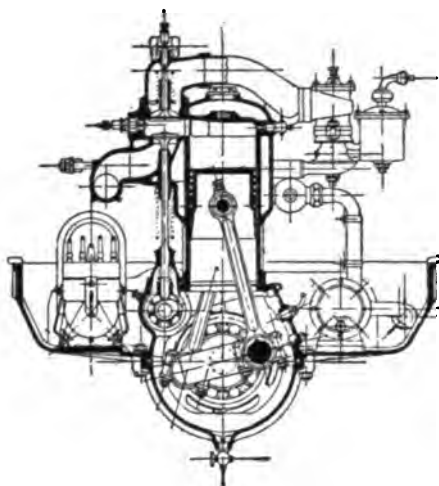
35 H.P. Horch Automobile Engine.
